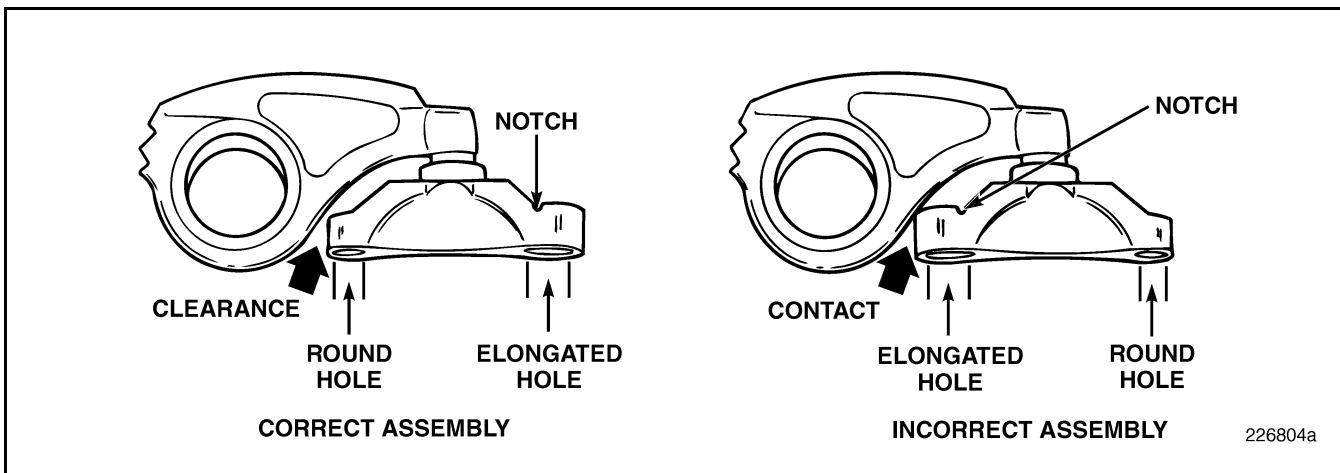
Proper Assembly of the Pinless Valve Yoke
